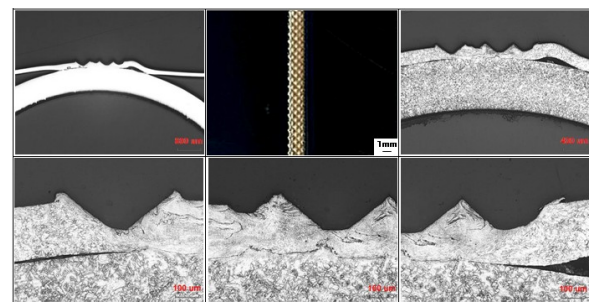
Cross sectional microstructure of ultrasonic welded solar thermal collector (welding speed: 4m/min, pressure: 76psi)
